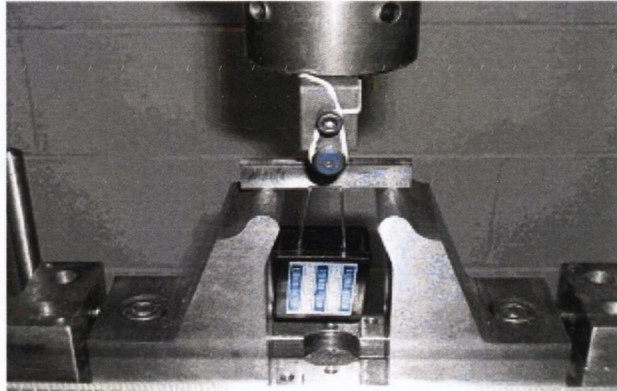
Mark II 3-point bend fixture with edm'ed recesses. A DICoMM specimen with CMOD gauge attached by integral knife edges can also be seen in the figure.
